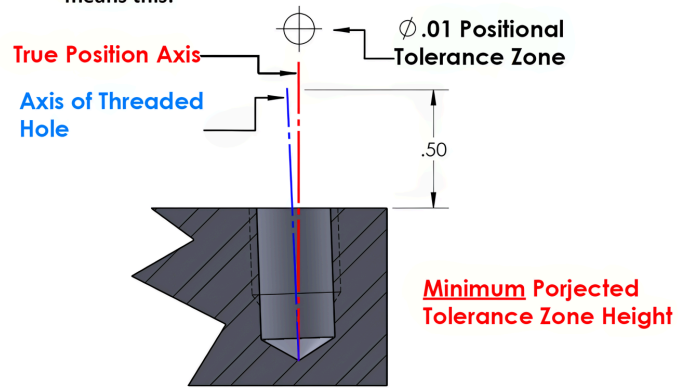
A projected tolerance zone is used to locate a positional tolerance above the part's surface.
